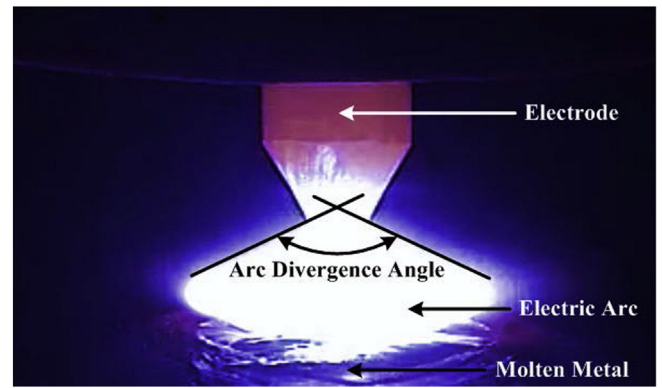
Arrangement of arc divergence angle for TIG welding.
